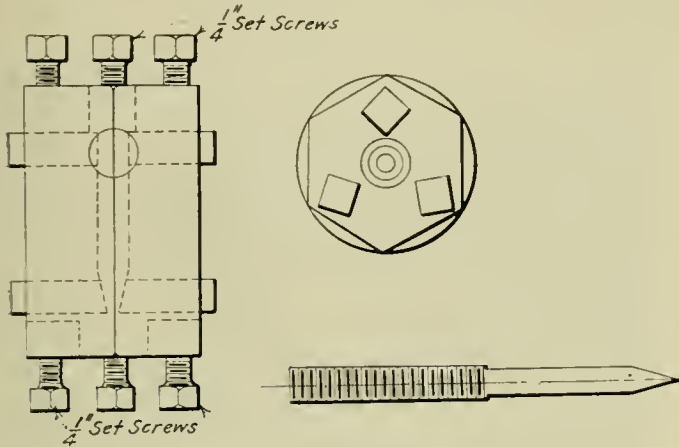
Box Tool for Refinishing Ends of Gage Cock Stems
